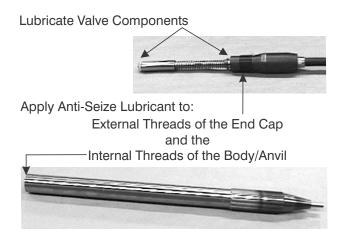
Prepare Tail Assembly and Body Anvil for Assembly.
